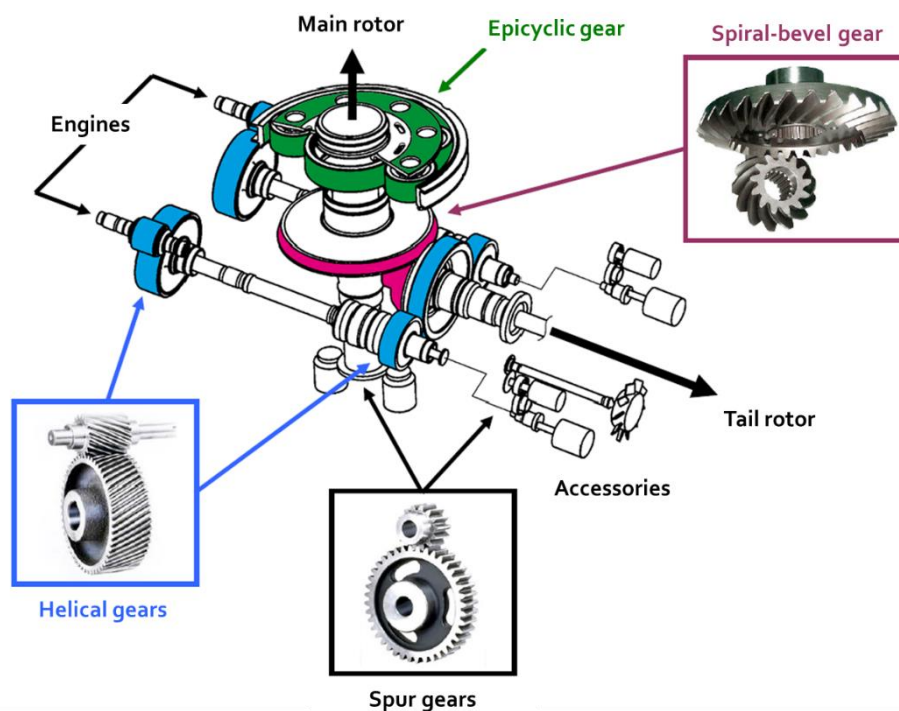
Components of the main gearbox of a twin-engine helicopter (from Roulois [3])
